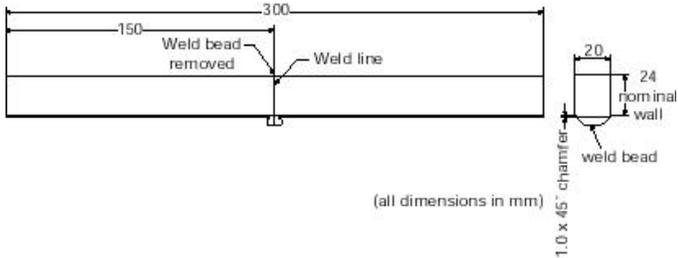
TYPICAL GEOMETRY AND DIMENSIONS OF BEND TEST SPECIMEN, AS DEFINED IN EN 12814-1
